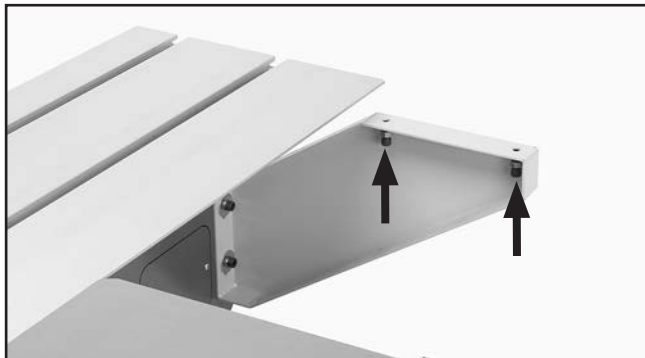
Small extension table support cap screws (table removed for photo clarity).
